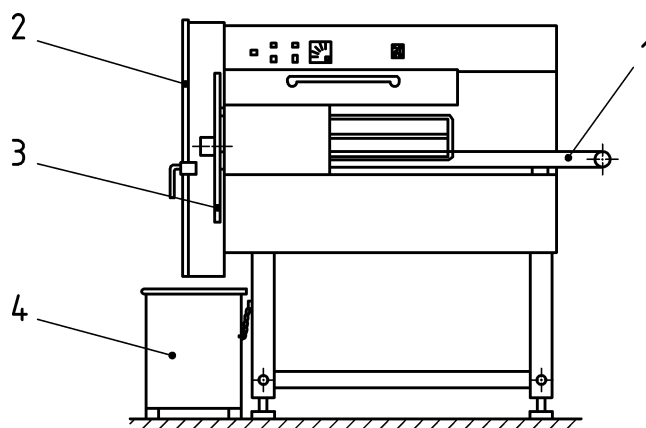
Cubes cutting machine type with forward feed plunger, lattice, sickle blade, feed intake hopper and loading device
